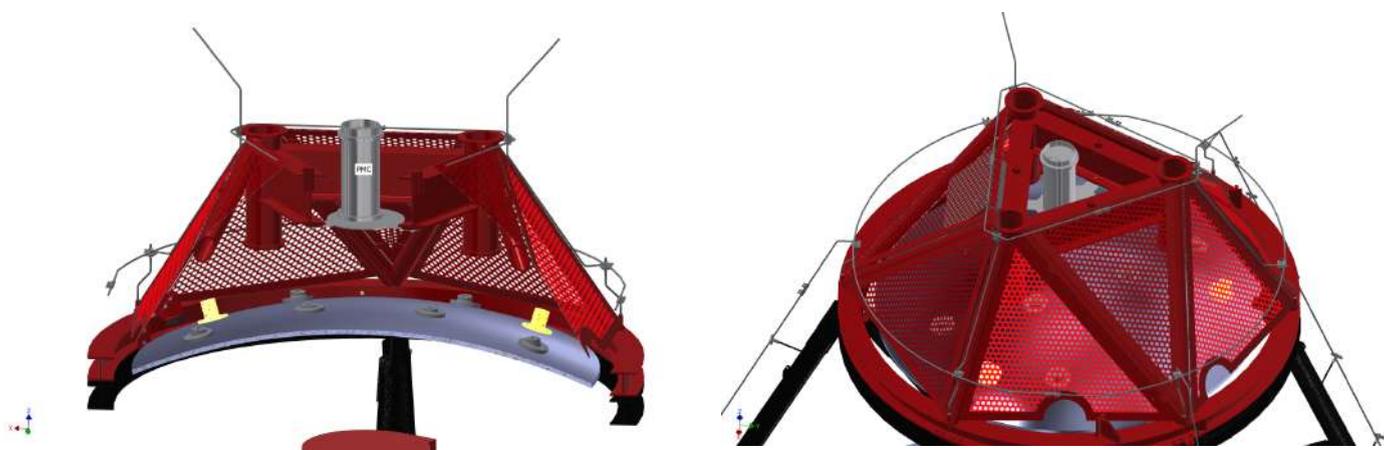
3D drawing of the PMC assembly mounted on the M2 shield.
